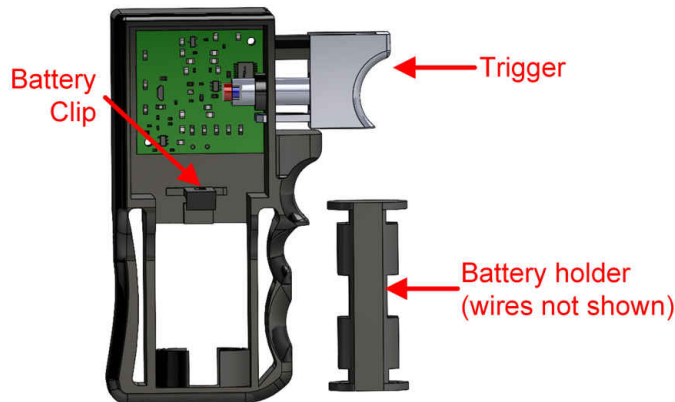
Front View With Battery Holder Outside Trigger Module
